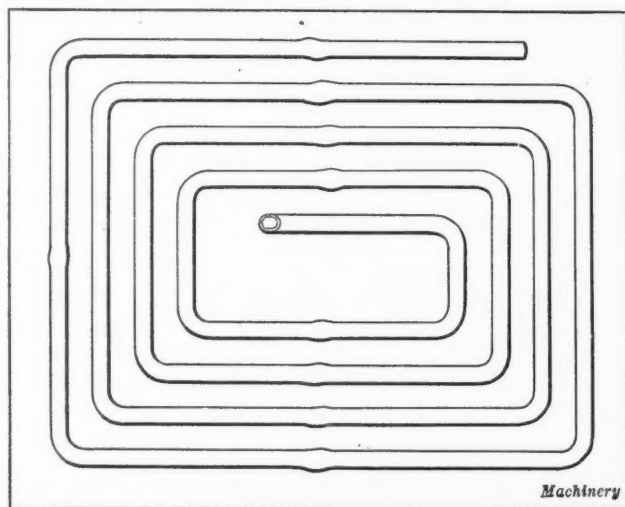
Diagram of Still Coil welded by Machine shown in Fig. 1
